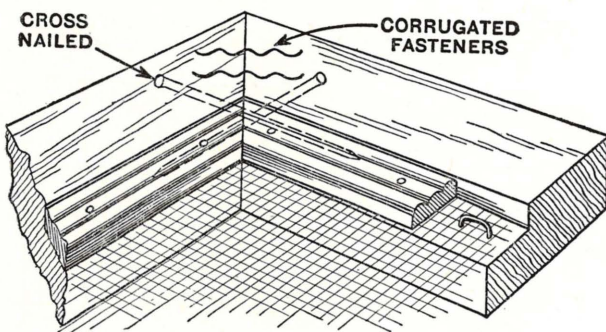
Regular screen stock assembled with miter joints and held together with corrugated fasteners and nails make a strong frame
